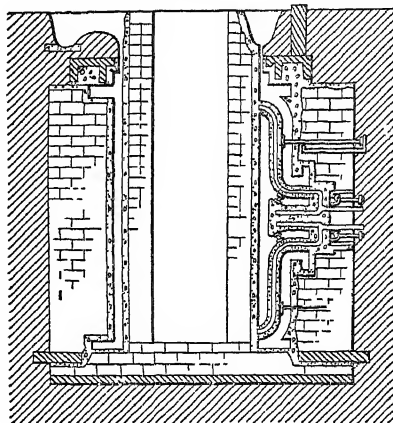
SECTION OF MOLD ARRANGED FOR CASTING A STEAM-ENGINE CYLINDER
